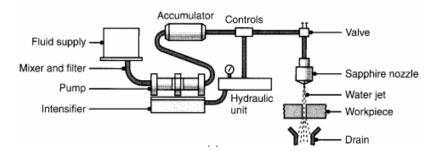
Basic scheme of the abrasive water jet machining[33]
